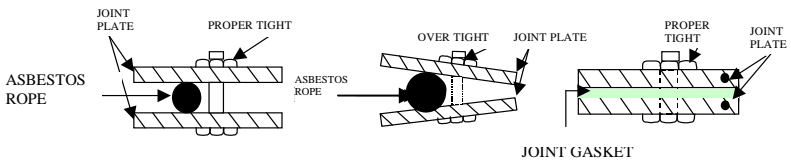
Jointing with high permanite sheet & asbestos rope
